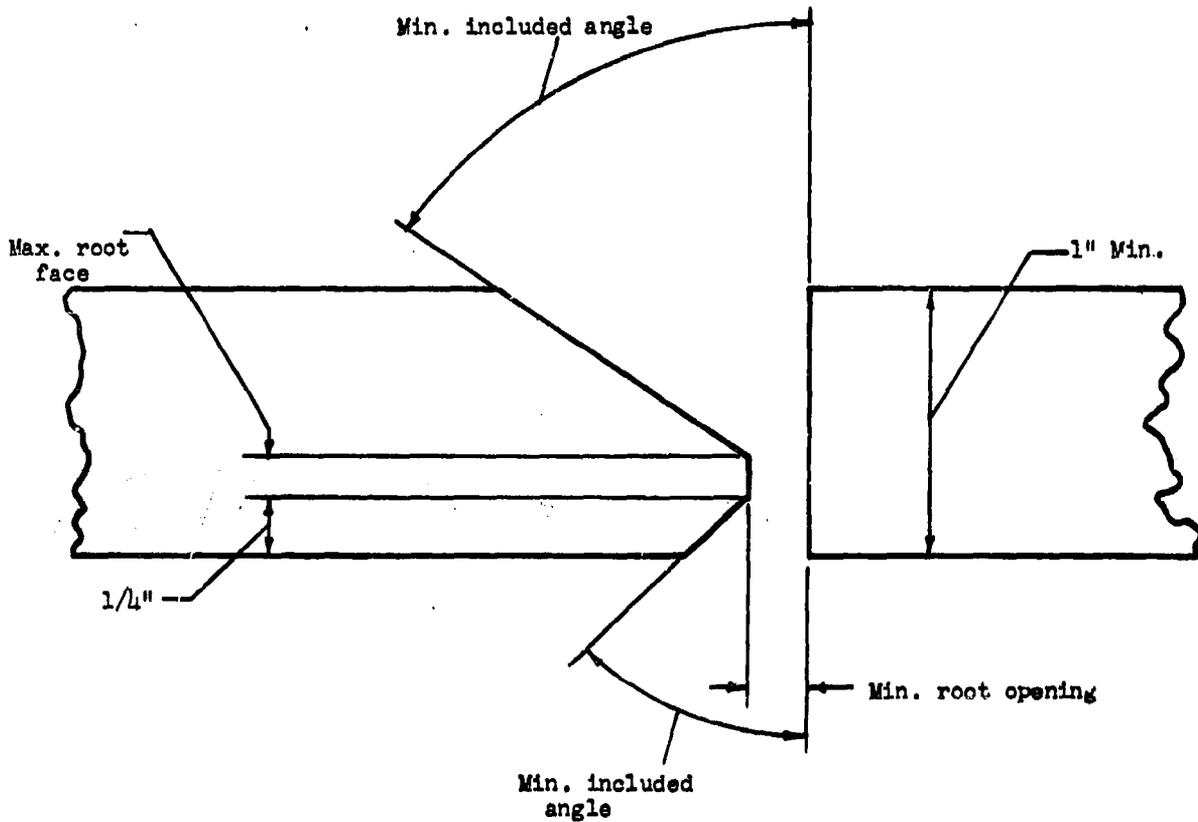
Welder Qualification Test Specimen.
